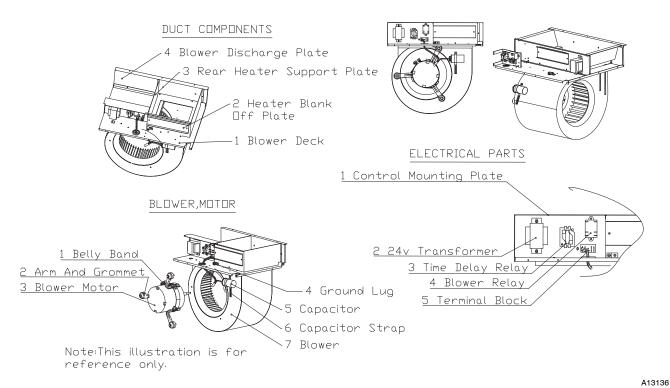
FFMA (sizes 18 & 24) Expanded View- Duct Components, Blower & Electrical Parts
